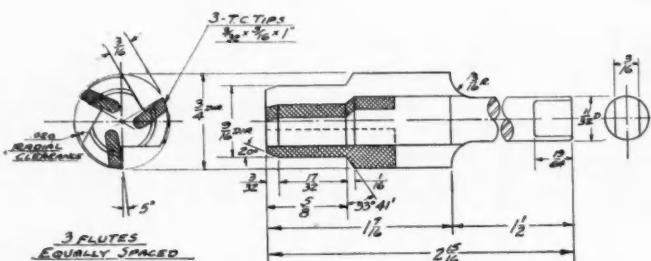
Combinations chamfering and counterbore and chamfer tool made by the Tungsten-Carbide Tool Co.
